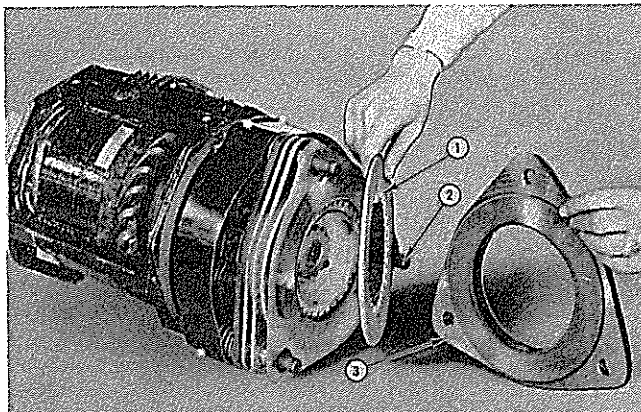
REMOVING BRAKE PLATE AND DISCS
